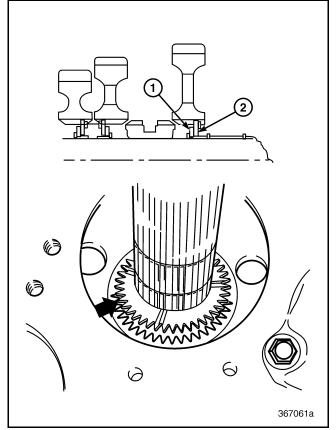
Removing External- and Internal-Toothed Thrust Washers
